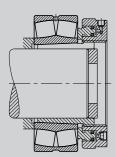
Dismounting of Withdrawal Sleeve by using Hydraulic Nuts
